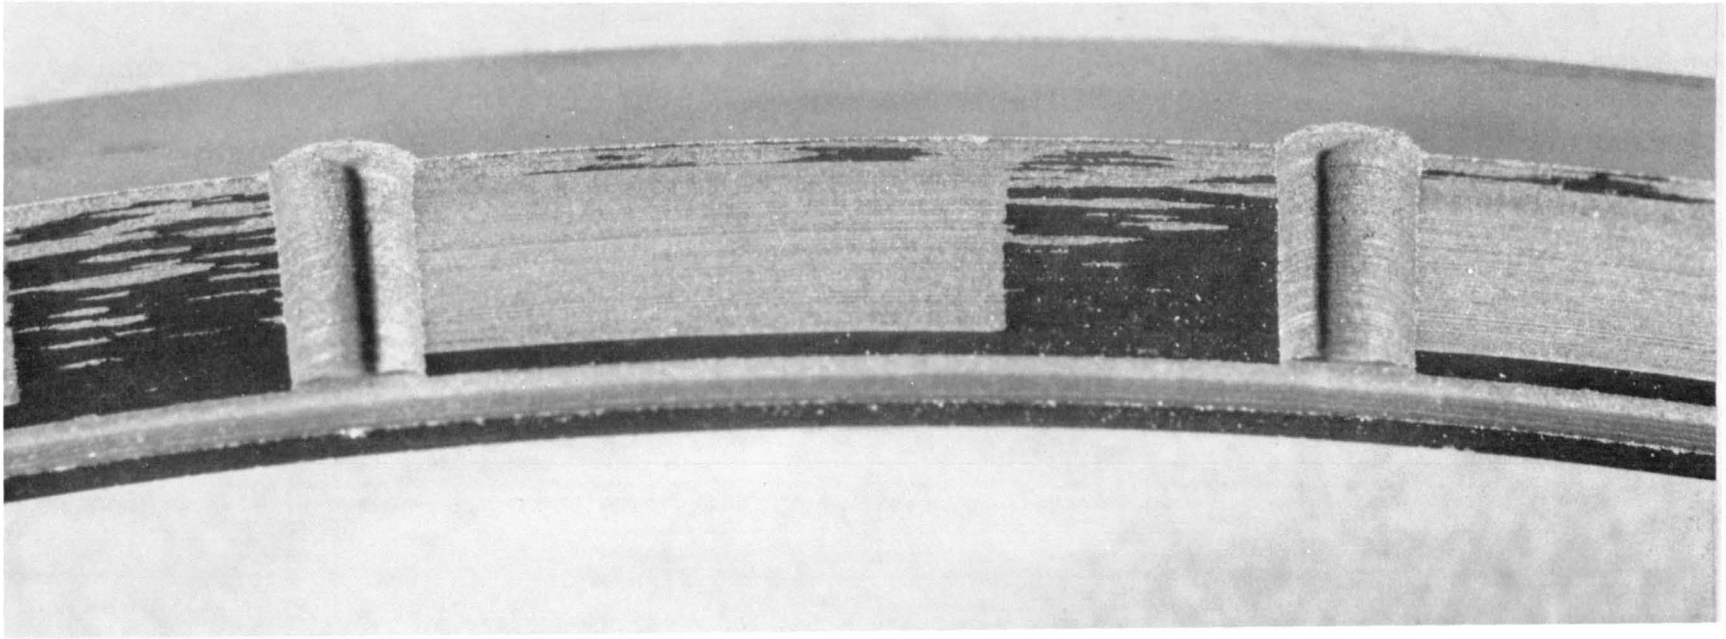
Helium Seal Typical LOX Side Carbon Ring 99RS006215, S/N 04, Posttest 490,
